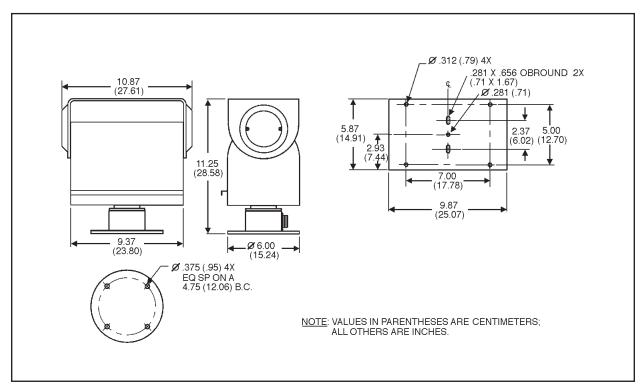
PT570P/PT570-24P Series Dimension Drawing
